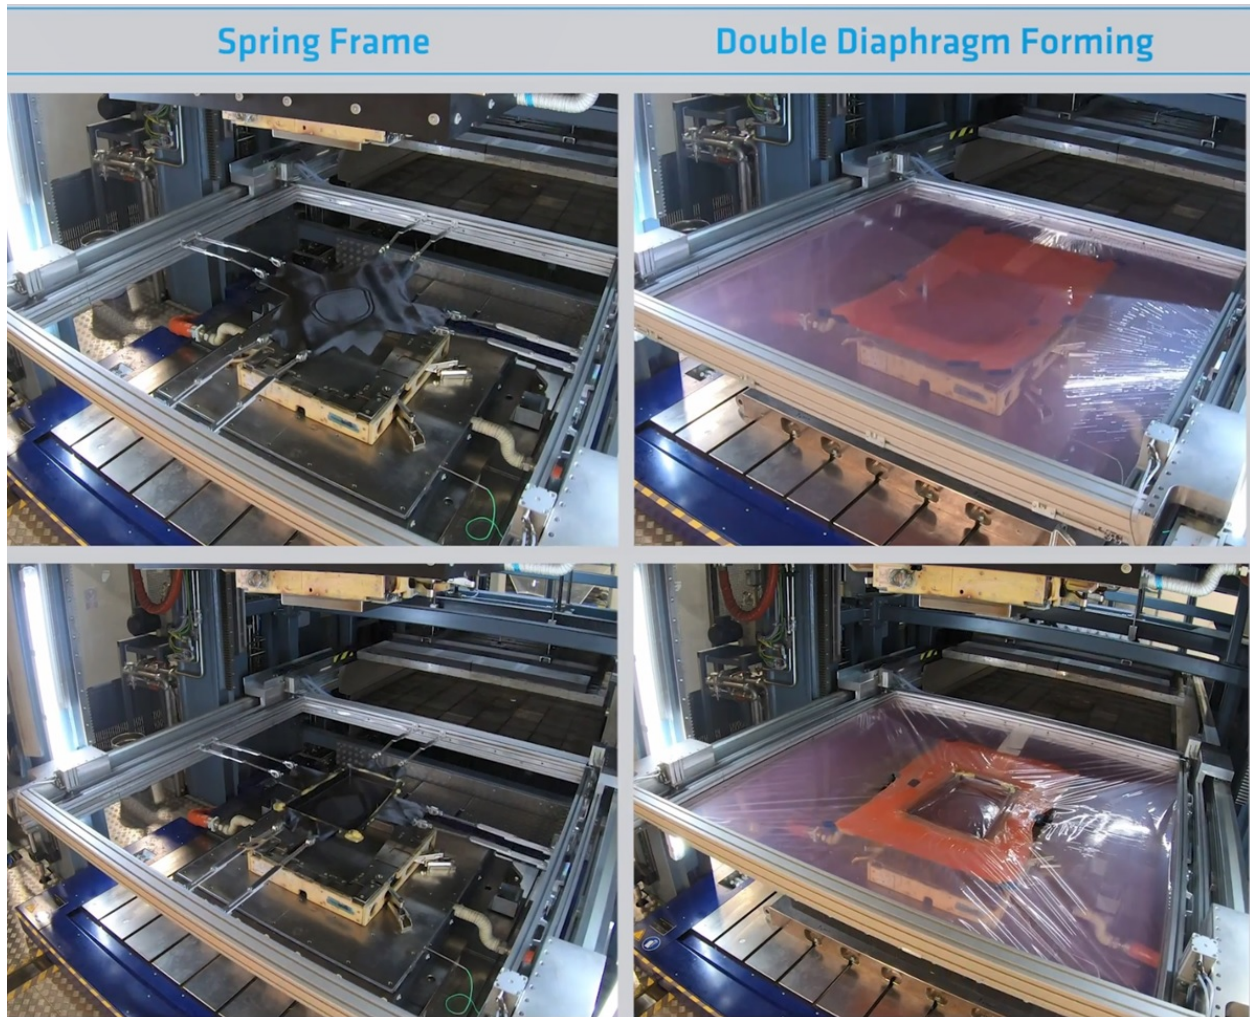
On top: blank shuttling from preheat to tool before closing. On bottom: part release
